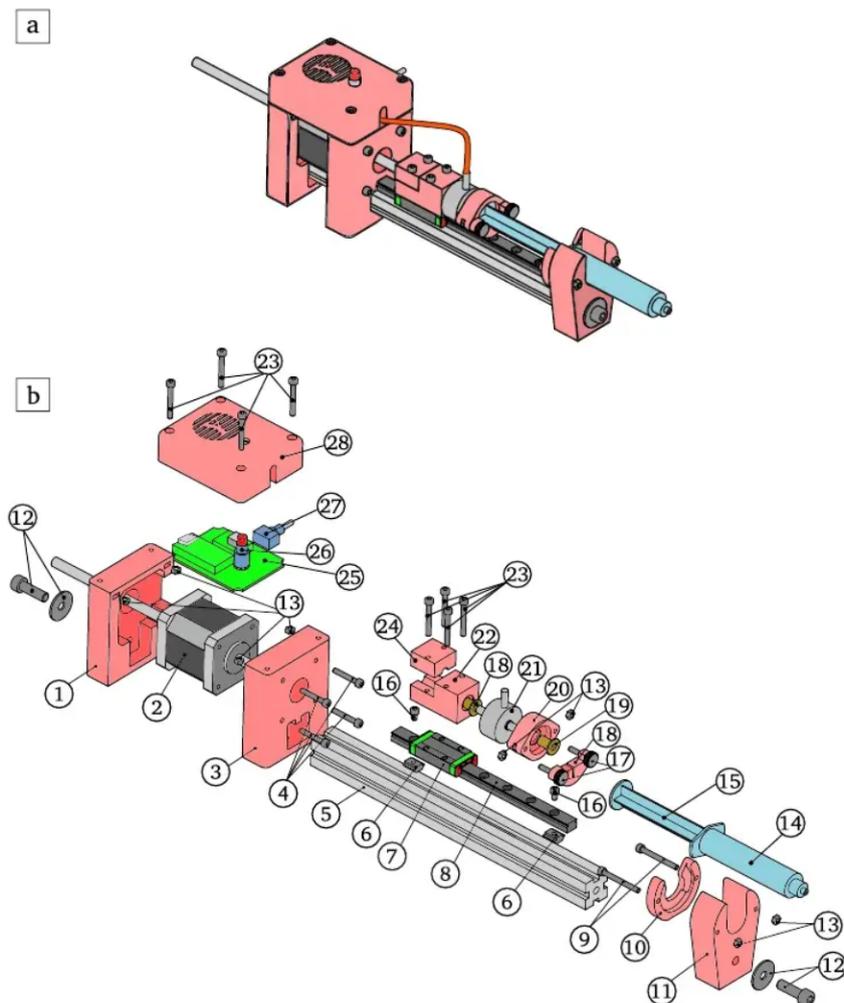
a) Ystruder assembly, 3D printed parts shown in red color b) Exploded view of the Ystruder assembly with part numbering using the same color scheme. For associating numbers with respective component names, the reader is referred to the web version of this article.
